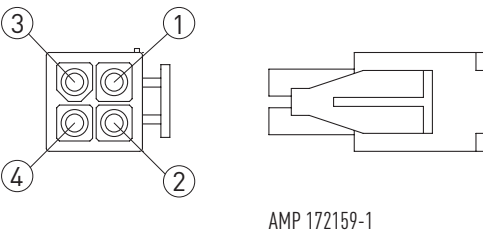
Connector assignment without brake, motor connector for 50 W – 750 W motors
